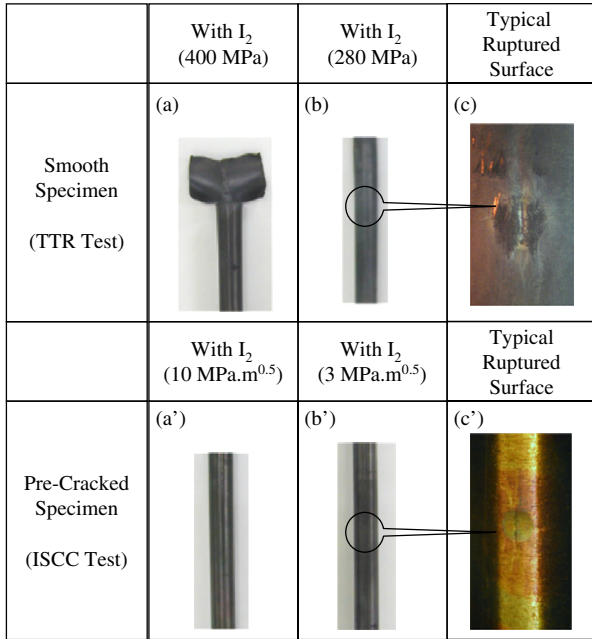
Photographs of Zircaloy-4 cladding after tests and typical ruptured surfaces.
